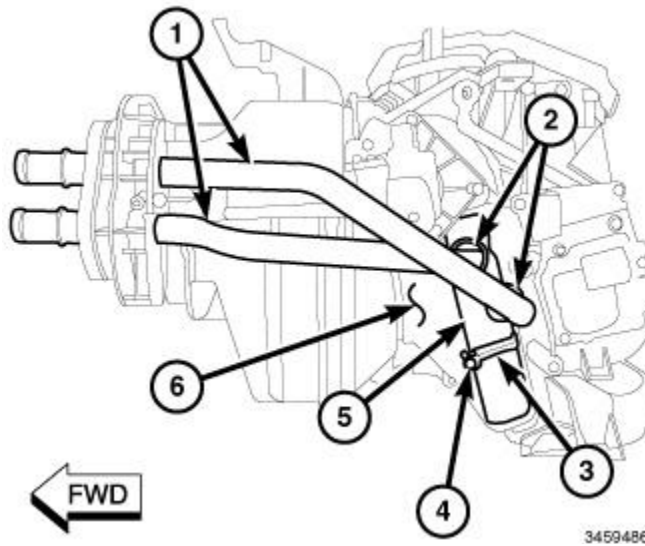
Two Clamps, Heater Core Tubes, Heater Core, Screw, Heater Core Bracket & HVAC Air Distribution Housing
